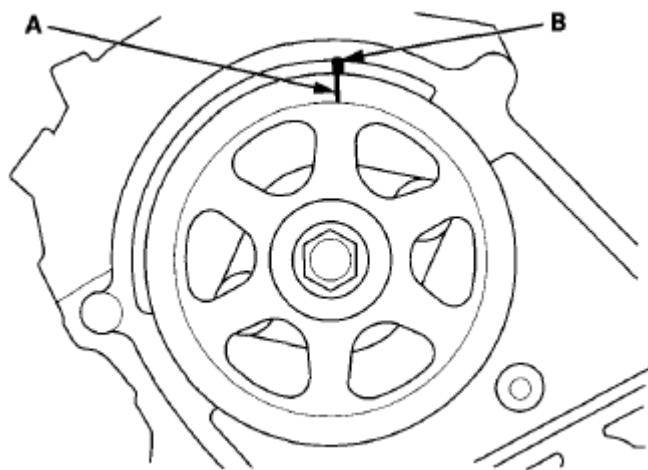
Identifying TDC Marks On Crankshaft Pulley And Pointers On Back Cover - Rear
